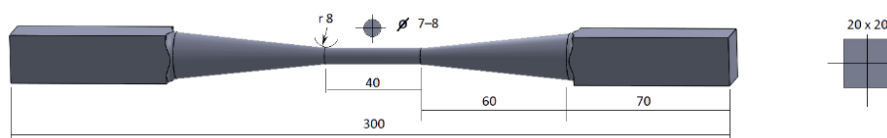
Dimensions and shapes of the cylindrical samples for tension test [3, 4]
